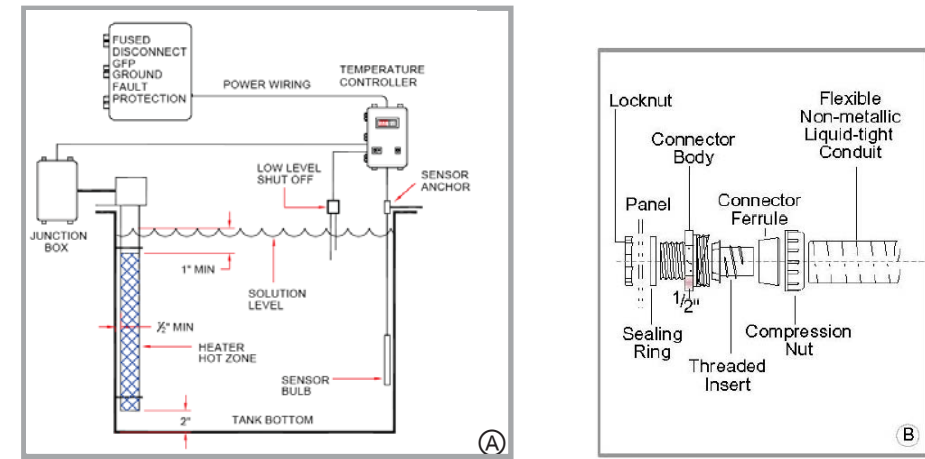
Typical Installation in a Process Tank (A), Flexible Non-Metallic Conduit Connection Installation (B)
